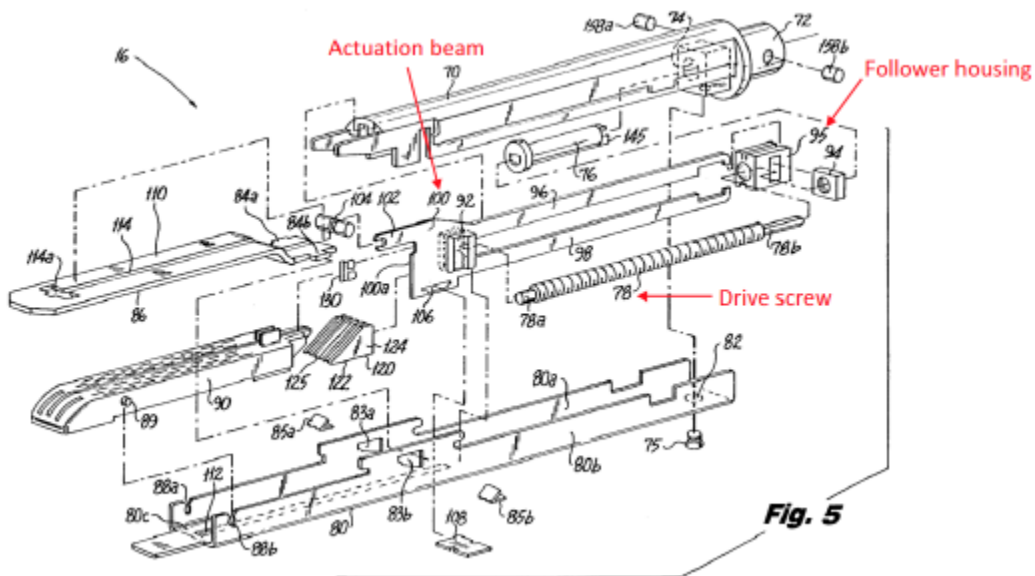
depicts an exploded perspective view of cartridge assembly 16 of Viola’s powered surgical stapler (Ex. 1013, 3:33–34), and is annotated by Patent Owner, to identify drive screw 78, follower housing 95, and actuation beam 100. Patent Owner asserts that Viola does not disclose that its knife member is “threadedly engaged on the drive shaft”; but rather,
